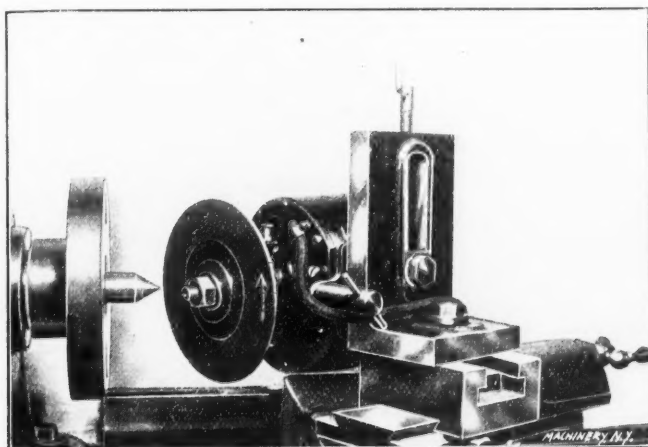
The "Lektro" Portable Grinder truing up a Lathe Center.
